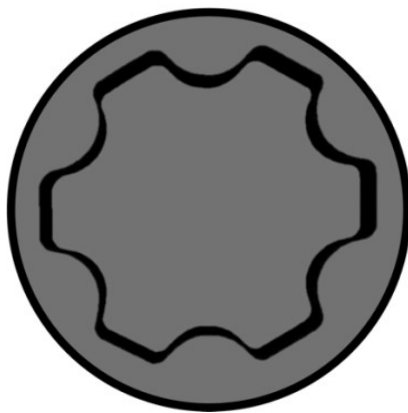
Schematic Representation of the Screw Head Geometry of Torx Plus Design. *Lobe*: The Protruding Parts of the Screw Head that Engage with the Driver. *Lobe Arc*: The Curved Edge of a Single Lobe, Indicating its Shape And Profile. *Driving Angle*: The Angle between the Screwing Direction and the Side of the Lobe. Created Using Adobe Illustrator CC 2023 (Adobe Inc., San Jose, CA, USA). These Findings Confirm the Study Hypothesis that Screw Head Geometry Influences Resistance to Stripping, with Torx Screws Demonstrating Superior Performance Compared with Torx+
